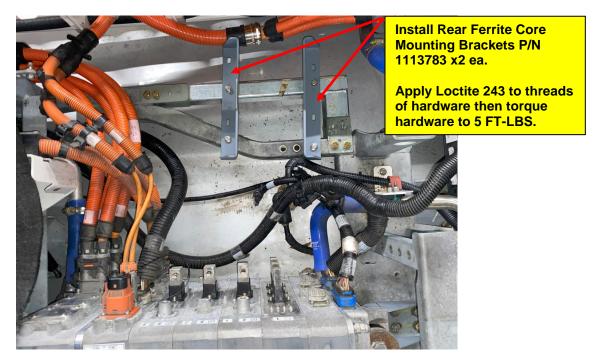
Install Rear Ferrite Core Mounting Brackets
